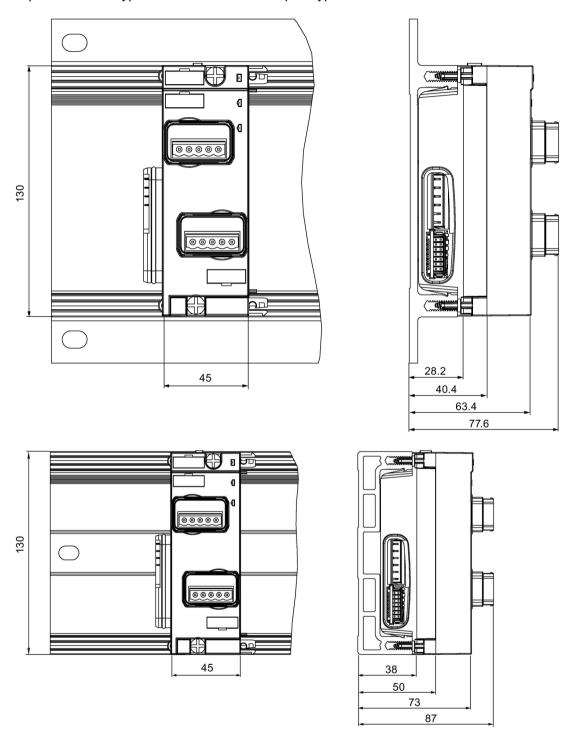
Dimensional drawing of the power module with CM PM PP connection module
